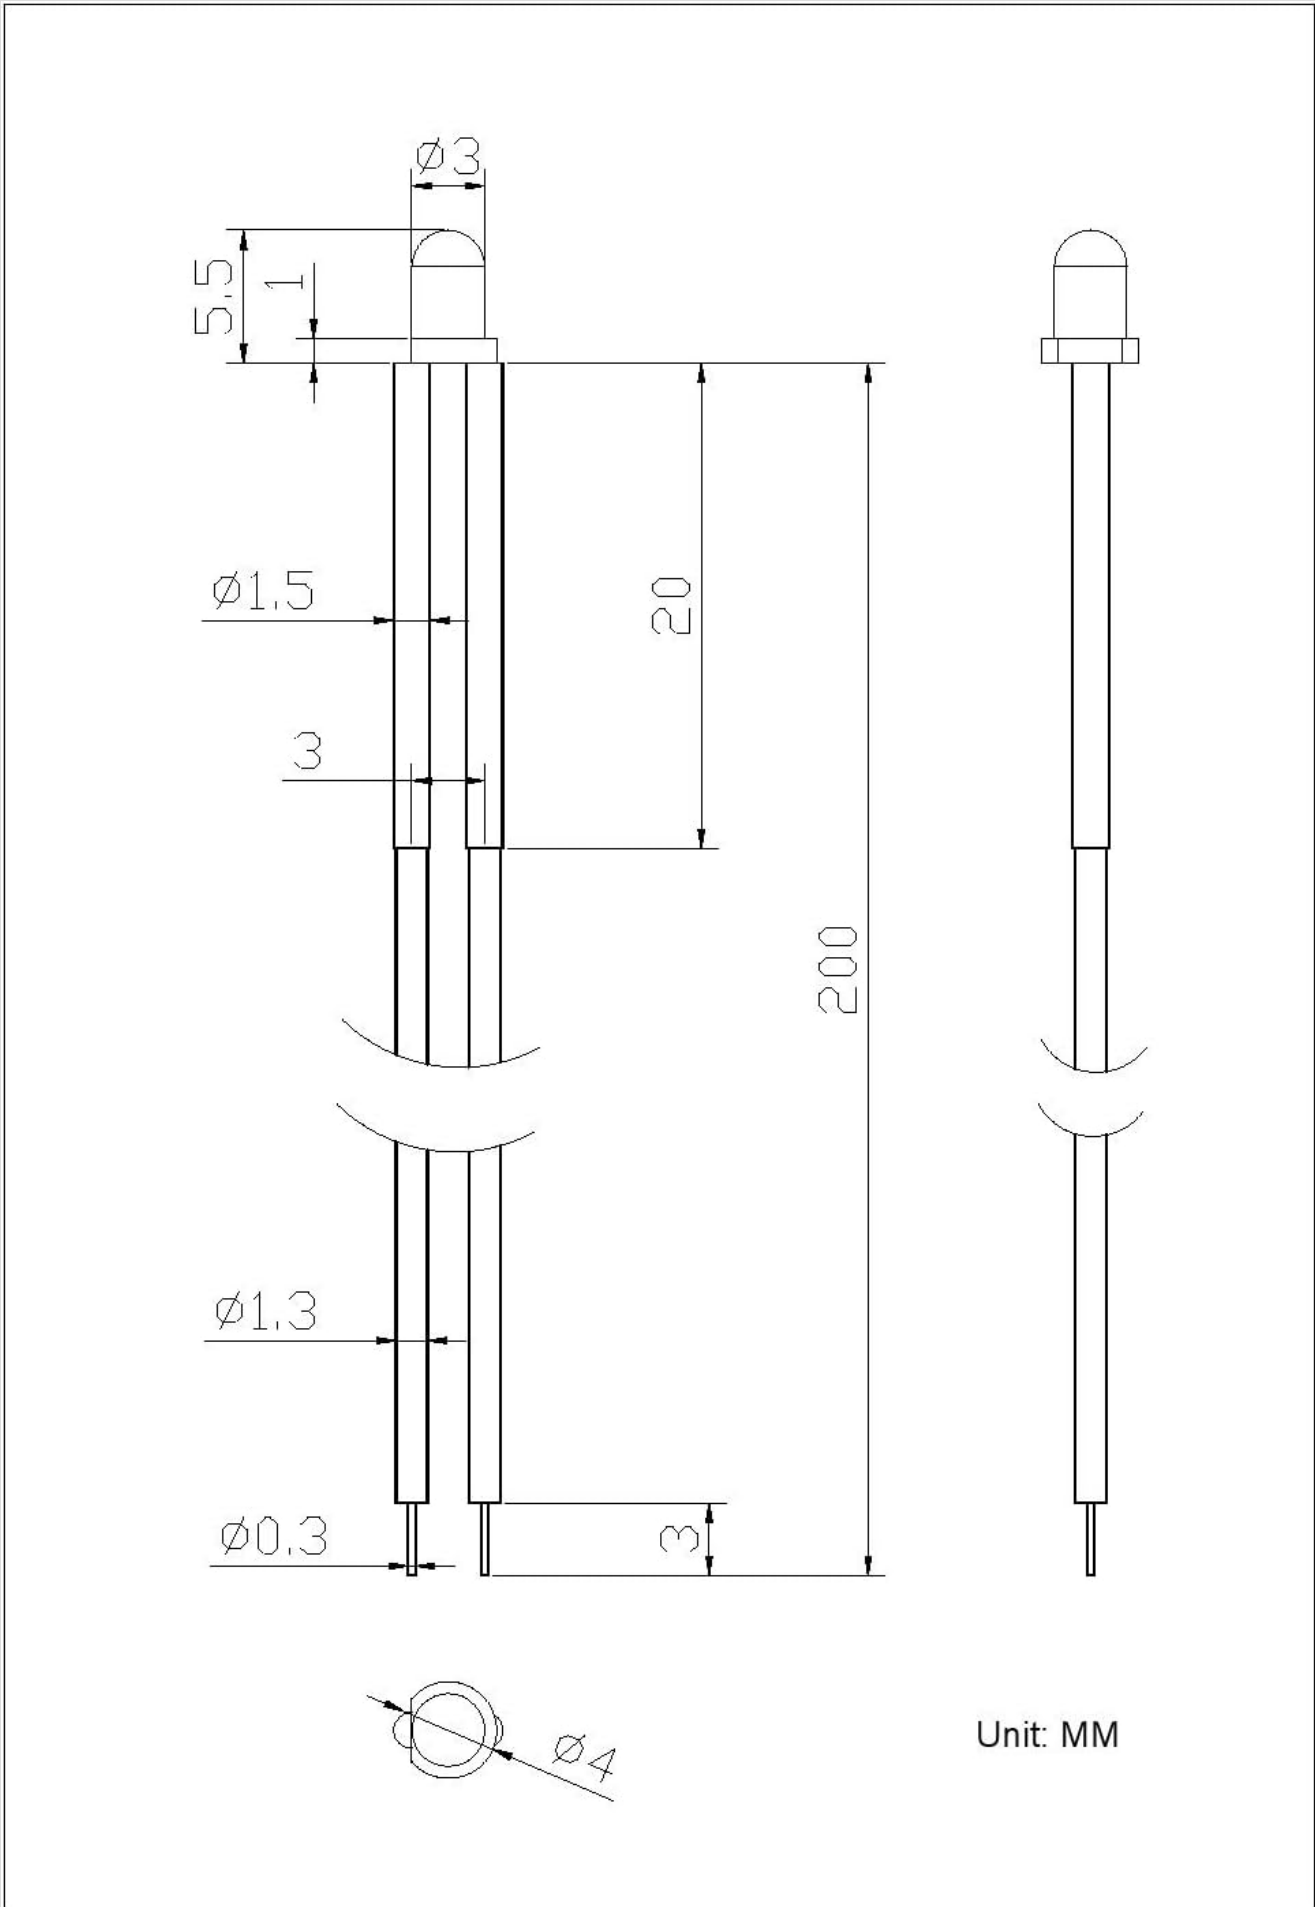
Dimensional drawing of the 3mm pre-wired LED, with measurements in millimeters.
